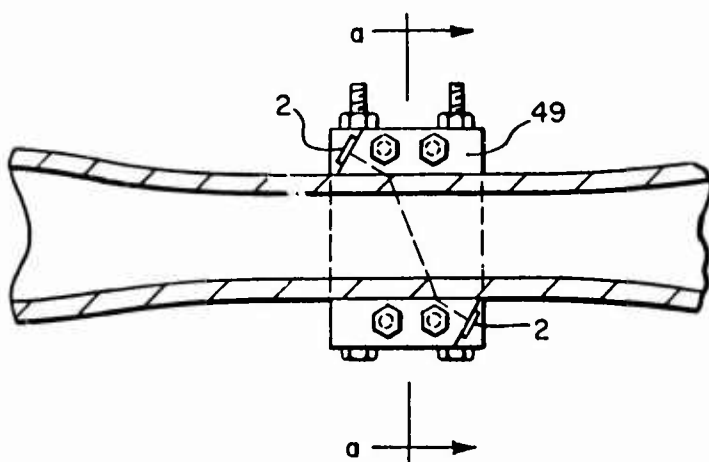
Clamp-On Assembly Transforming Circular Cross Section to Square.
